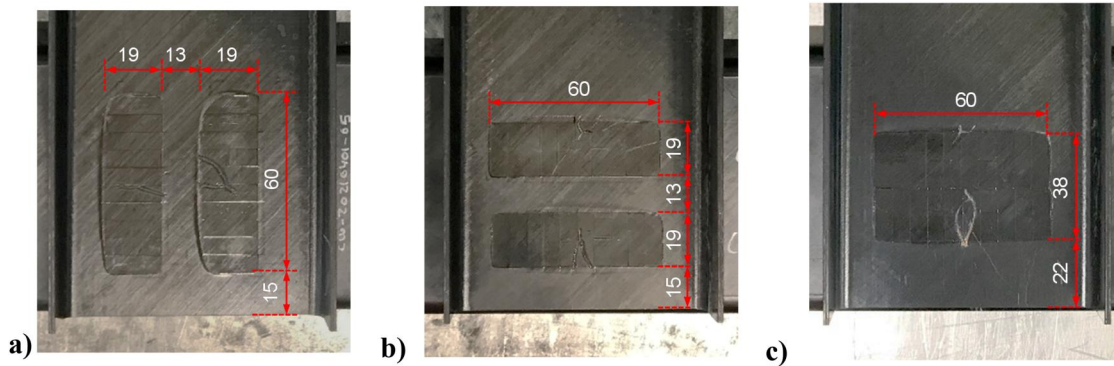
Geometry and nominal dimensions of the welded strips for the three configurations: (a) vertical; (b) horizontal; (c) horizontal (joined) (dimensions in mm).
